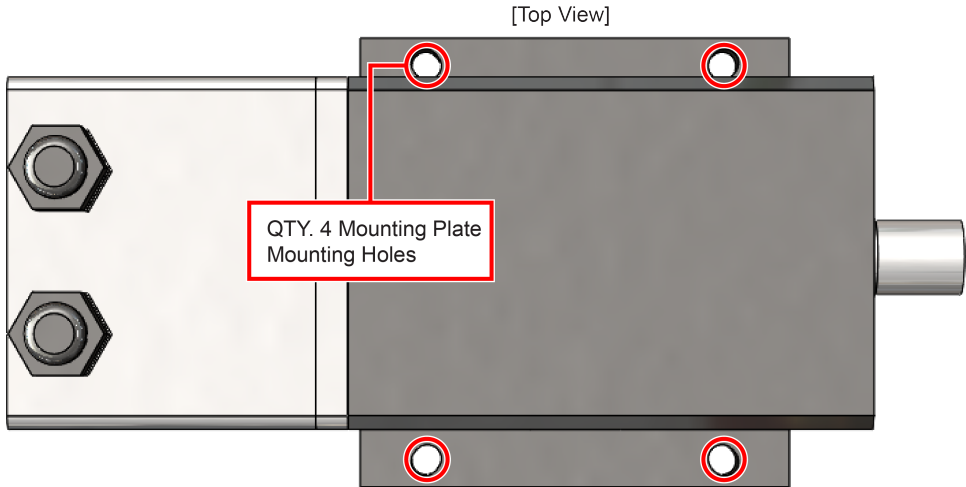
ASR1000 Stage Showing Mounting Plate (Top View)
